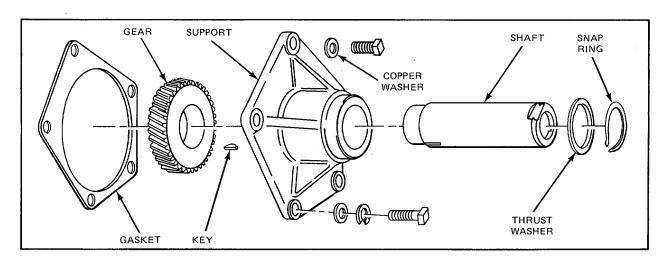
Blower Drive Gear and Support Assembly Details and Relative Location of Parts (In-Line Engine)
